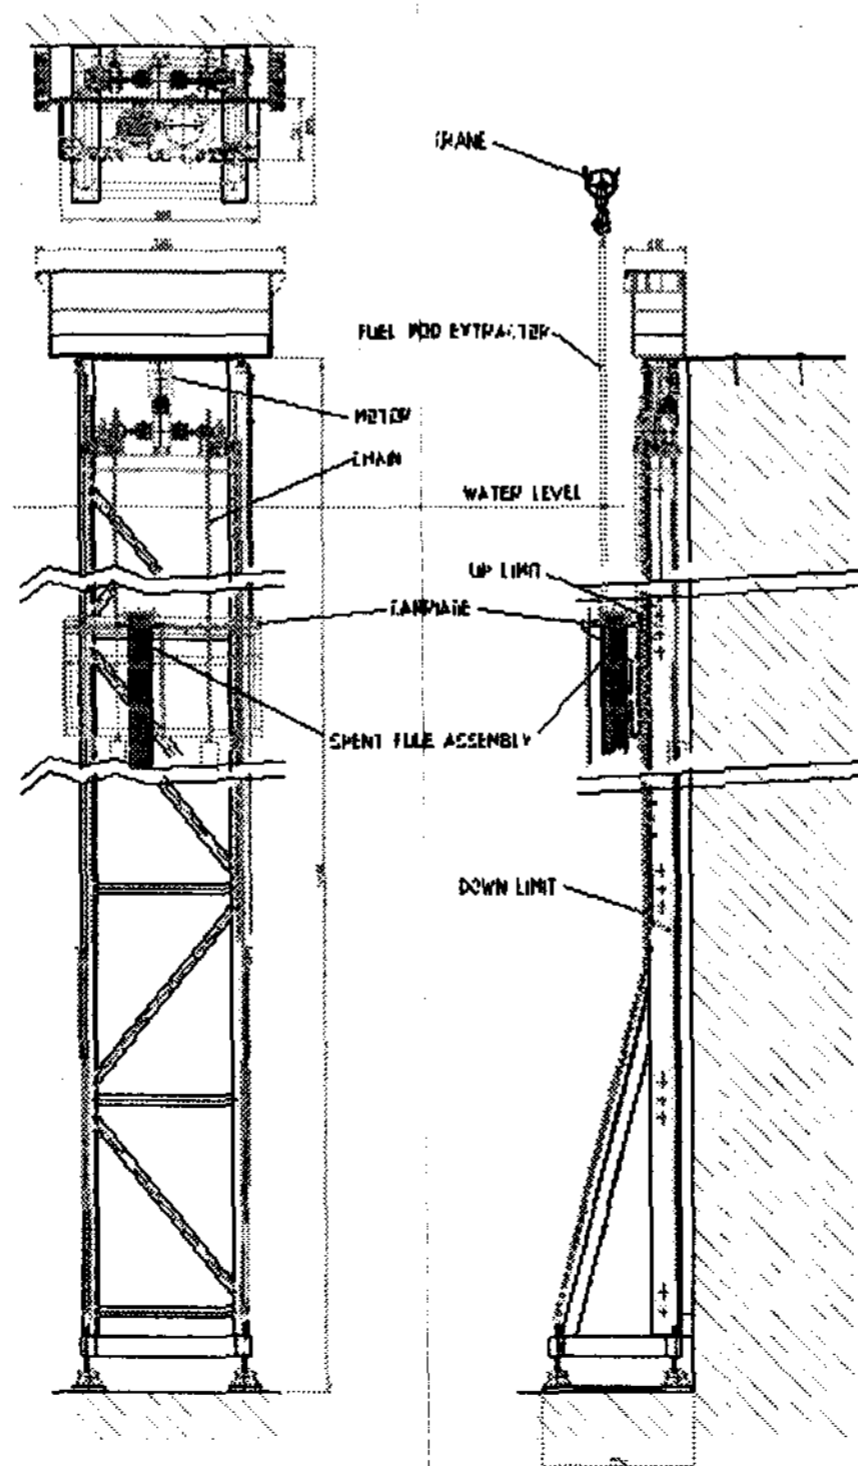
Multipurpose dismantling equipment for spent fuel assembly
